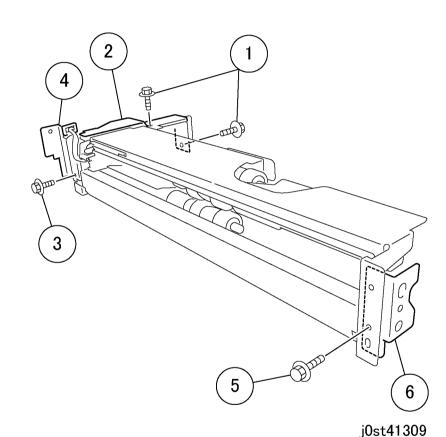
Removing the Tray 4 Feeder (j0st41309)
